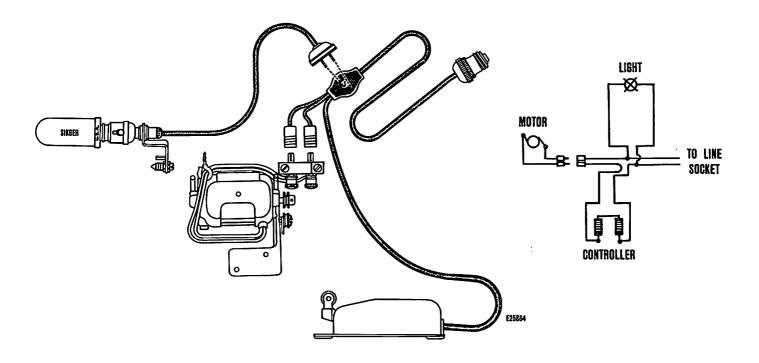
Wiring Diagram for BU107A Motor on 24-65 Machine with Foot Control
